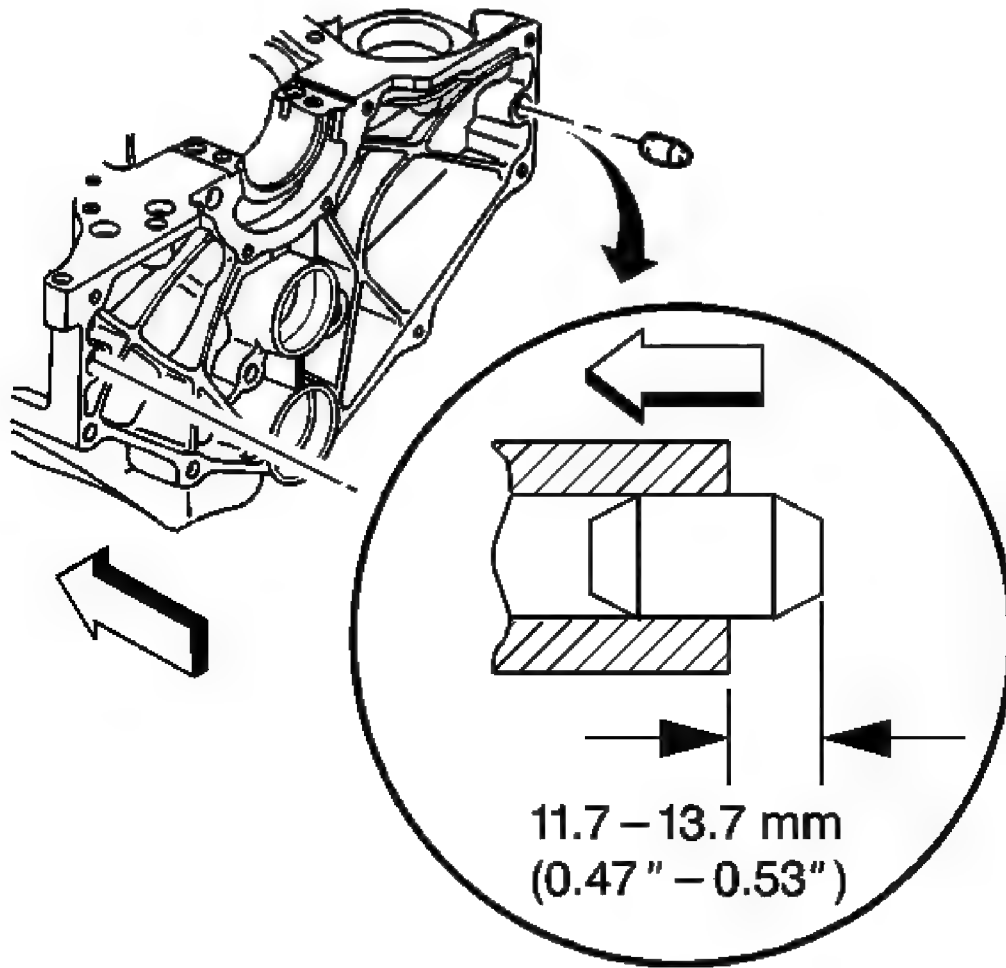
Installing Transmission Locator Dowel Straight Pins
